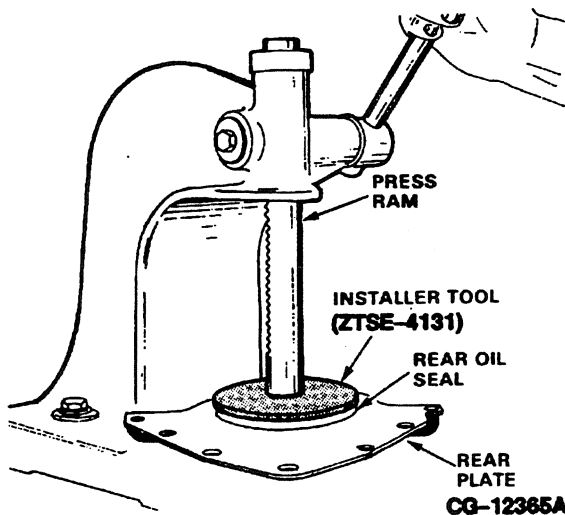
Pressing Rear Oil Seal into Rear Cover Bore Using Installer Tool (ZTSE-4131) and Arbor Press
